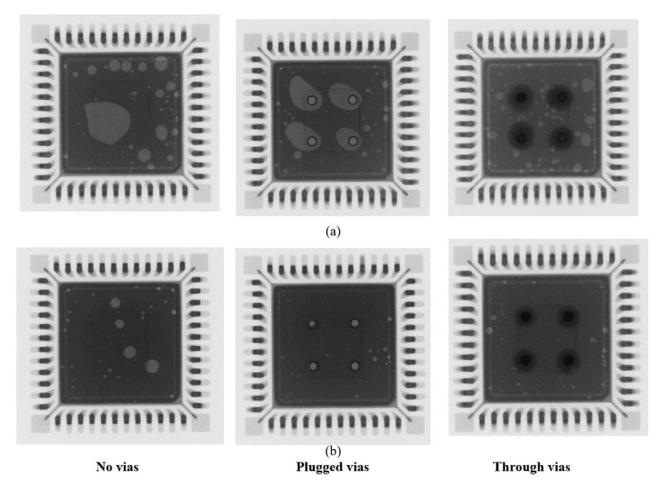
X-ray images of different via design the larger QFN components assemblies built with (a) solder paste only and (b) PF+paste with different via design.
